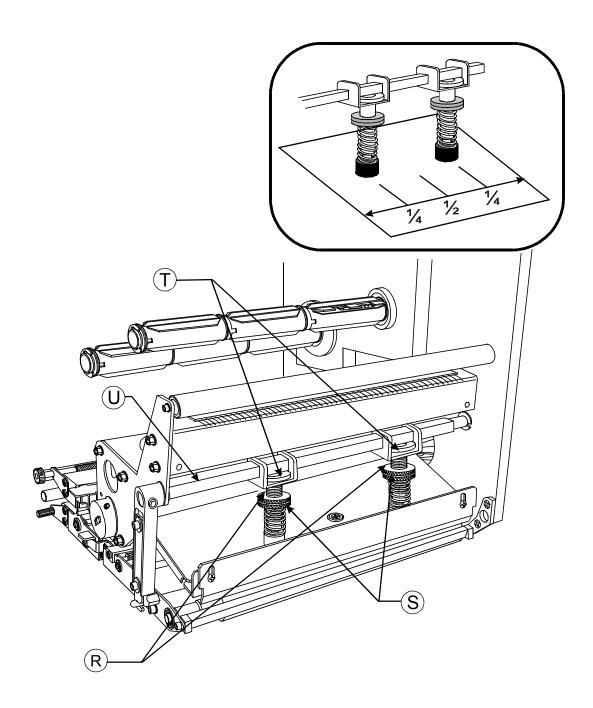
Printhead Pressure (Right-Hand Unit Shown)
